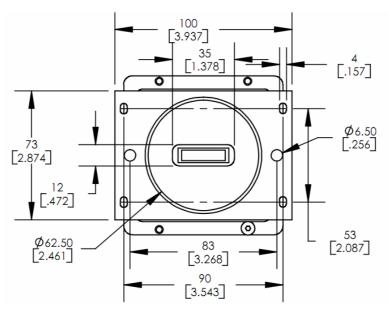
Standard Body (Type A) with Rectangular Flange (Type A) - Front View
